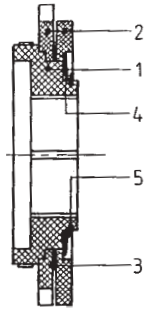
Rotary Cam Switch GSWFKu 03 SR without Cover
